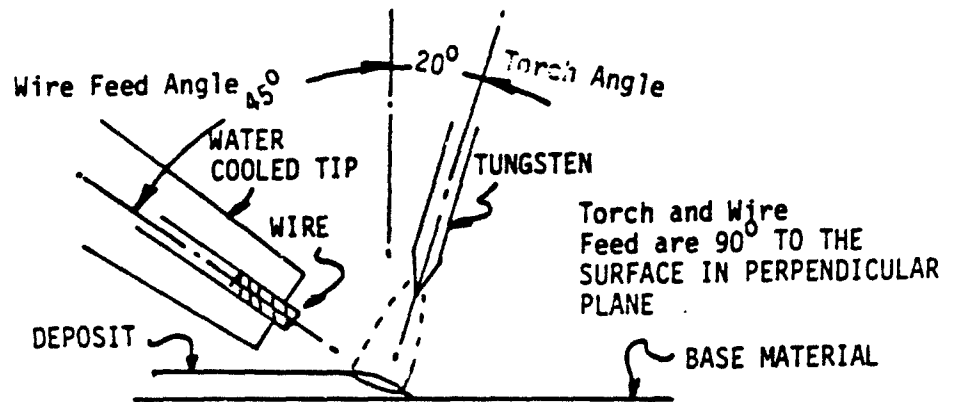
Dabber synchronized current pulsation in the backhand mode. With current in low pulsation, the weld puddle and heat are directed at the deposited weld metal.
